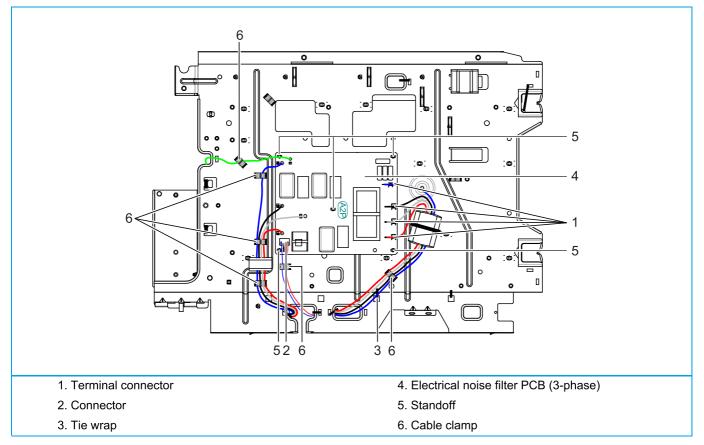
Stripping the main PCB assembly 3-phase (front)
